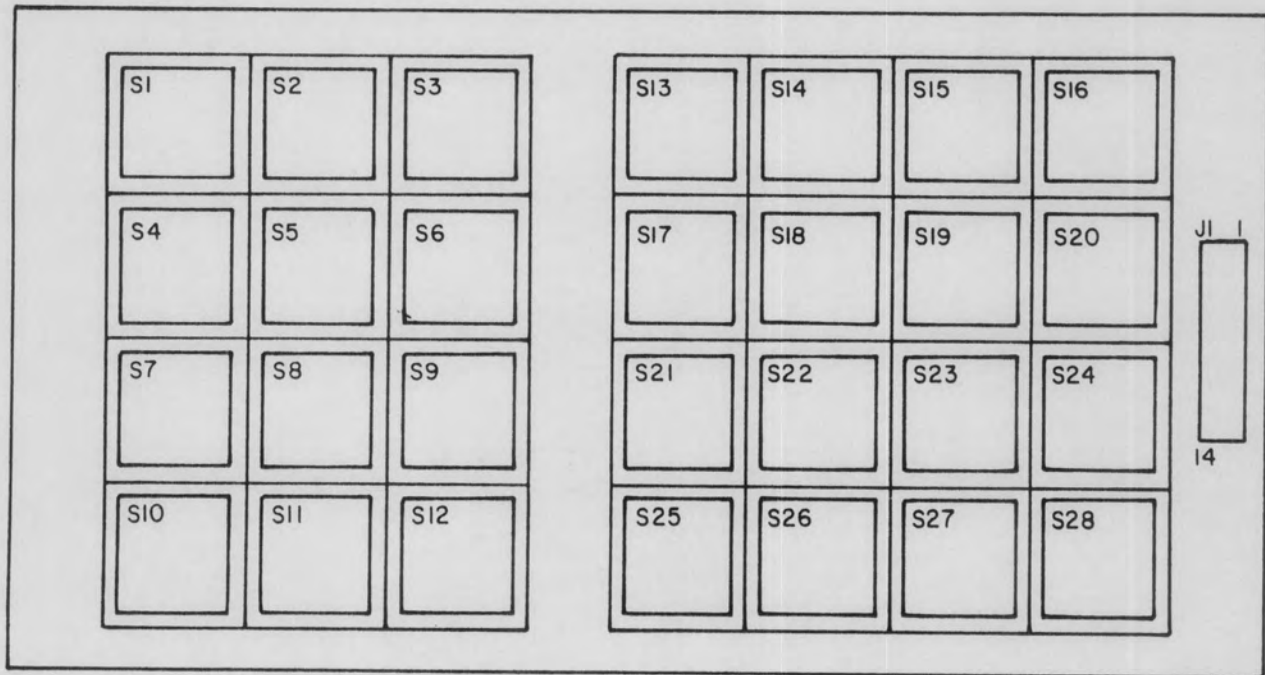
Type 371037-2 Keyboard Assembly (A8), Location of Components
